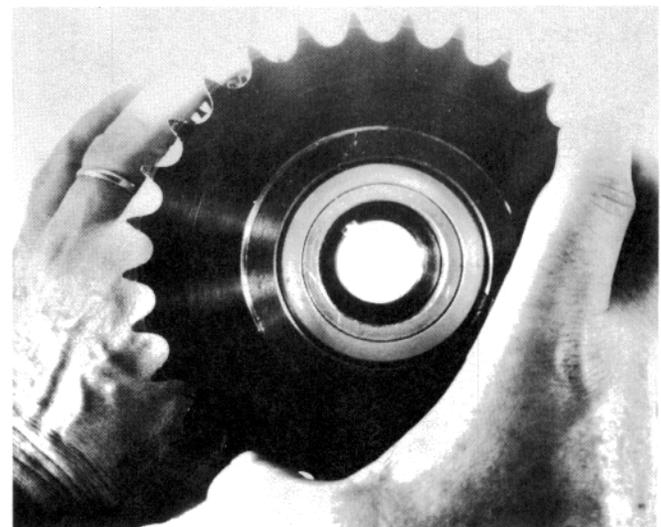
Cocking Clutch Sprocket and Cocking Clutch Gear Separation
